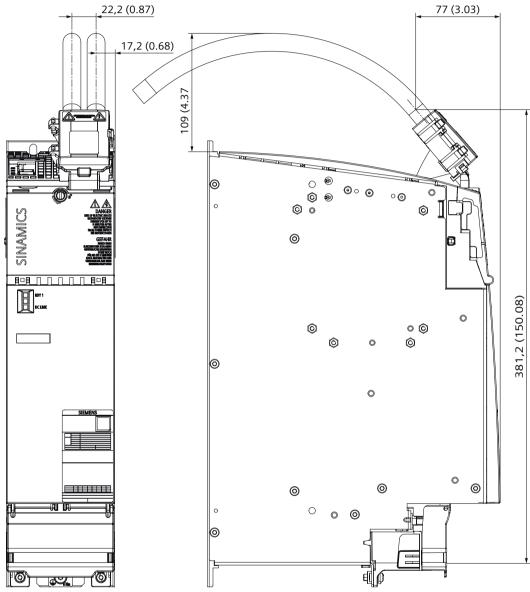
Dimension drawing of a 100 mm wide component (Motor Module) with 72 A DC link adapter, all dimensions in mm and (inch)
